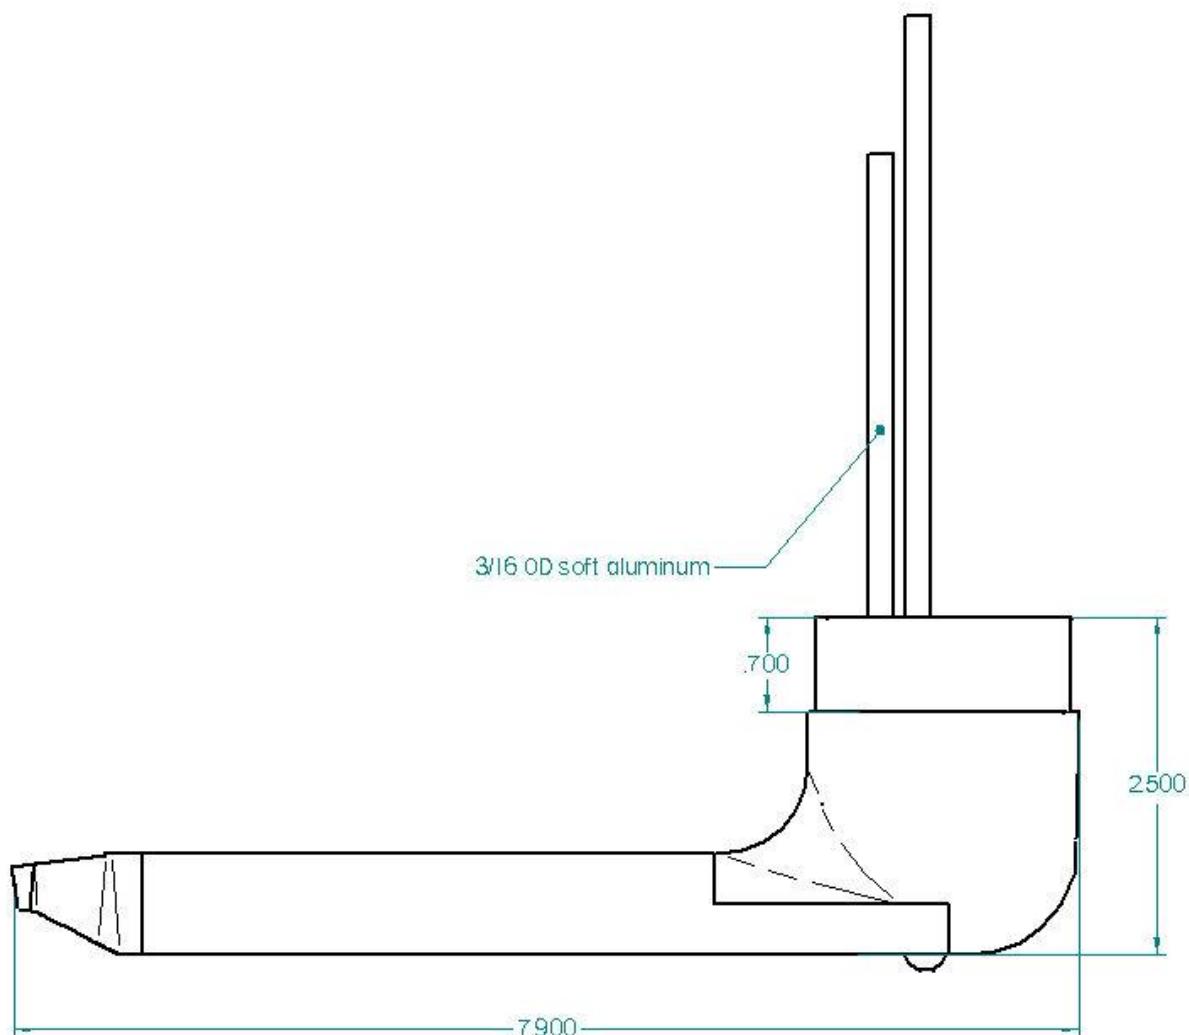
Standard Mount AOA/Pitot Probe Dimensions (Side View)
